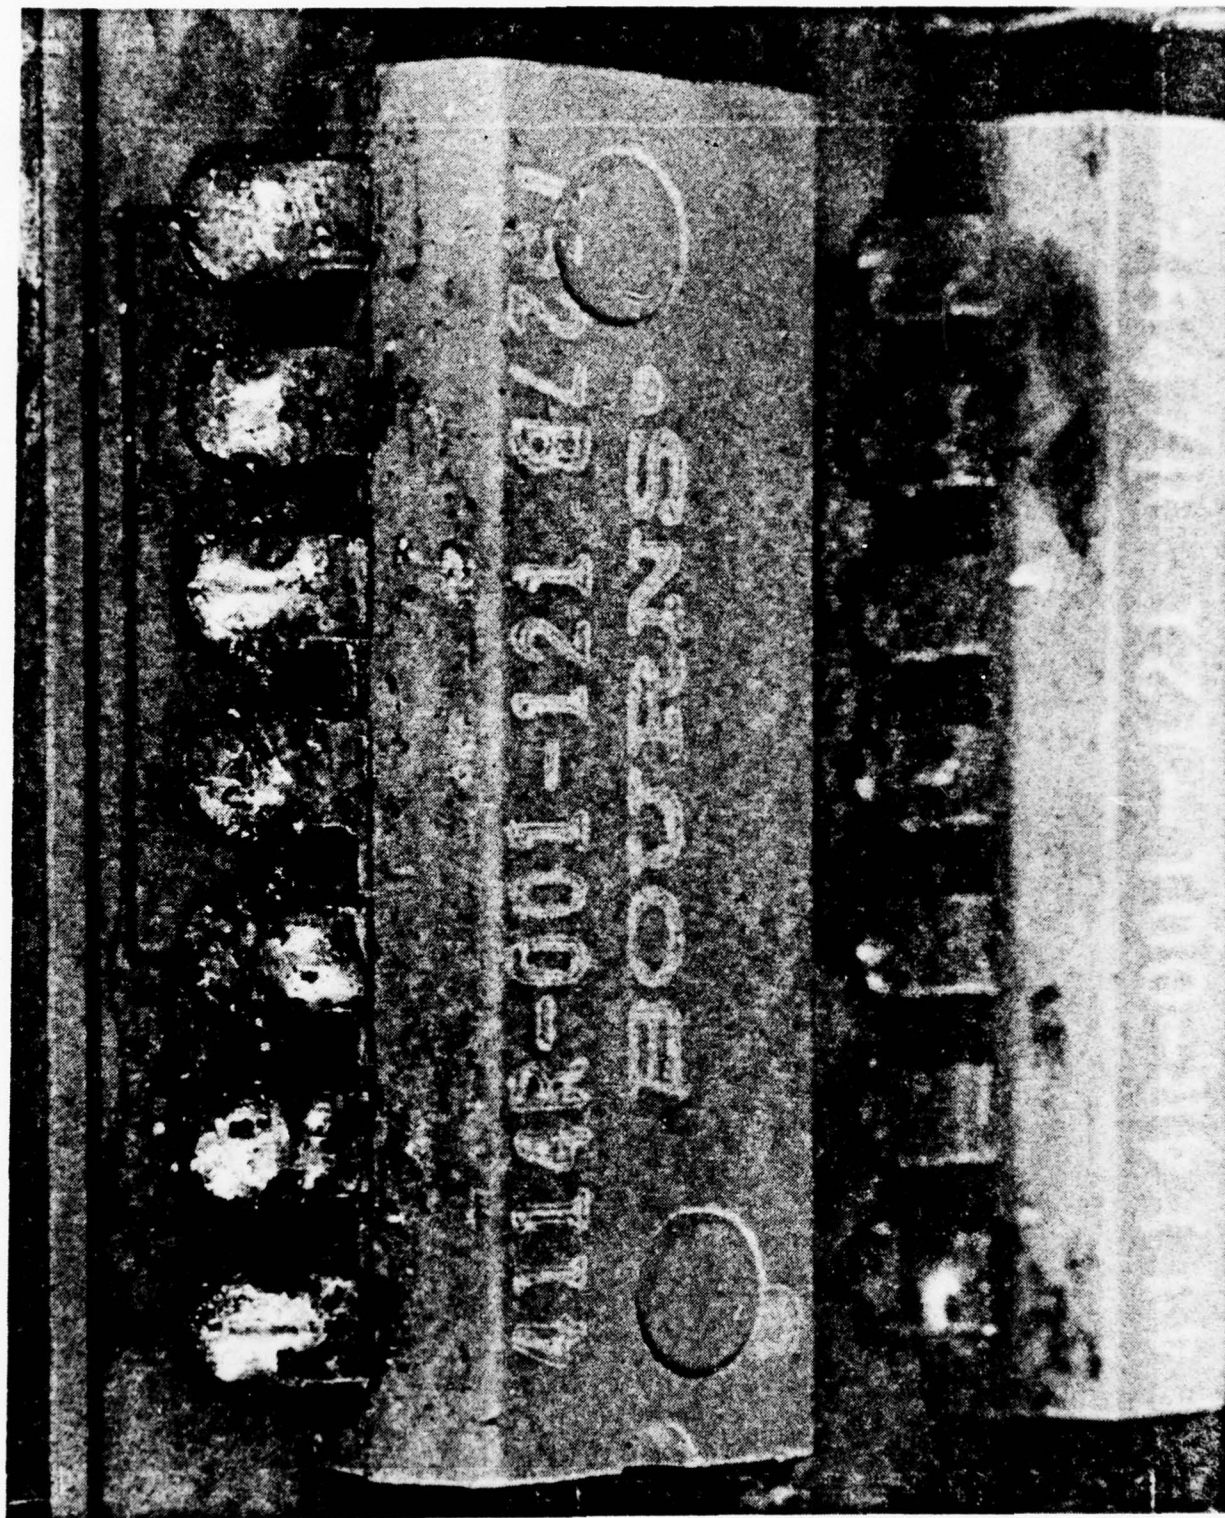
DIP PACKAGE SOLDERED DIRECTLY TO CERAMIC MODULE
